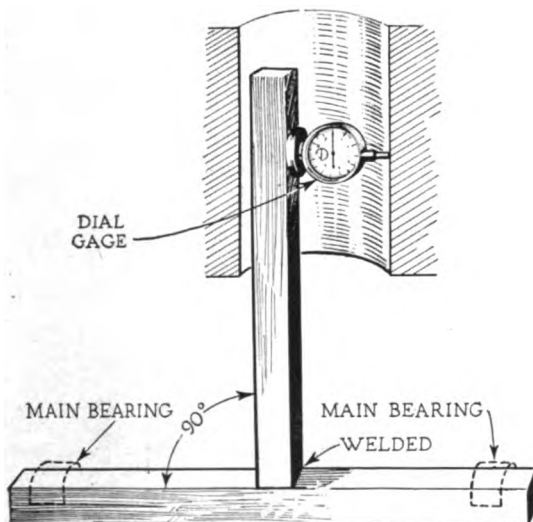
A testing jig consisting of two square bars welded together and machined or ground off so that they are at 90 deg. or right angles. The multiplying gage will indicate whether the cylinder wall is at right angles to the crankshaft bearings
